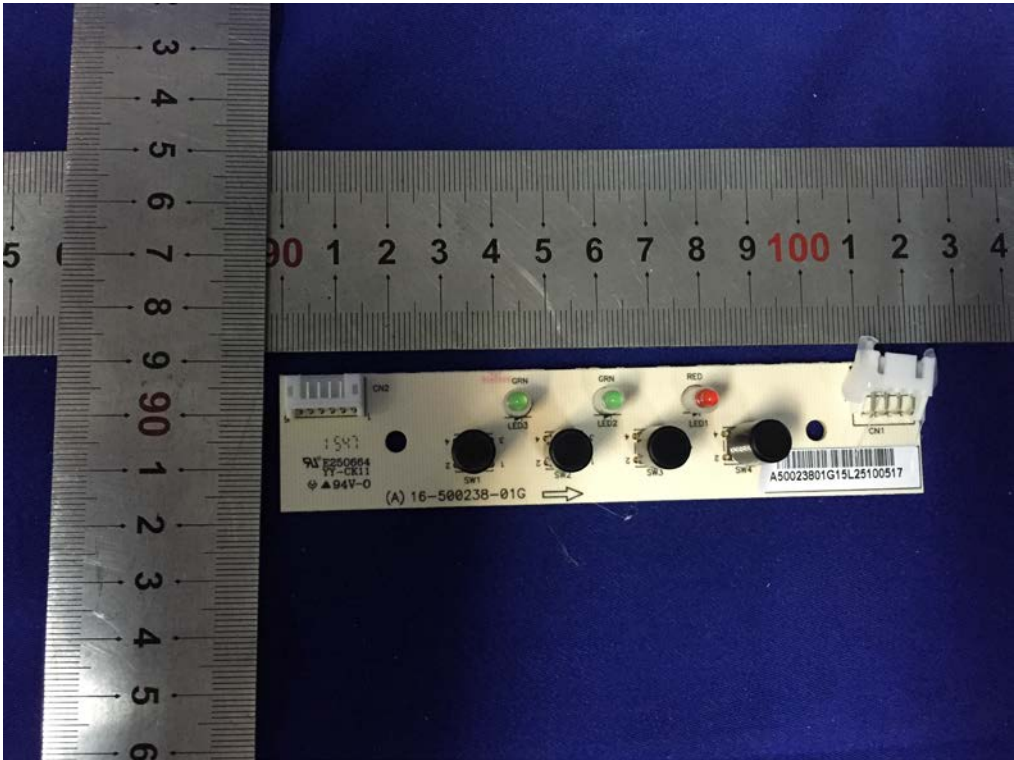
FlnInfini Lite 3kW-48V&FlnInfini Lite 4kW-48V PCB of panel board components view
